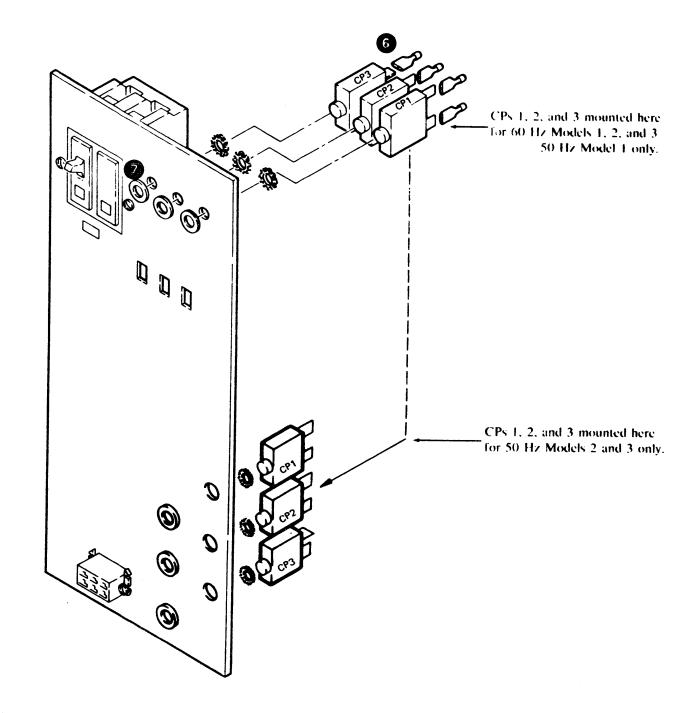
24-Volt AC Sequencing Assembly Removal and Replacement
